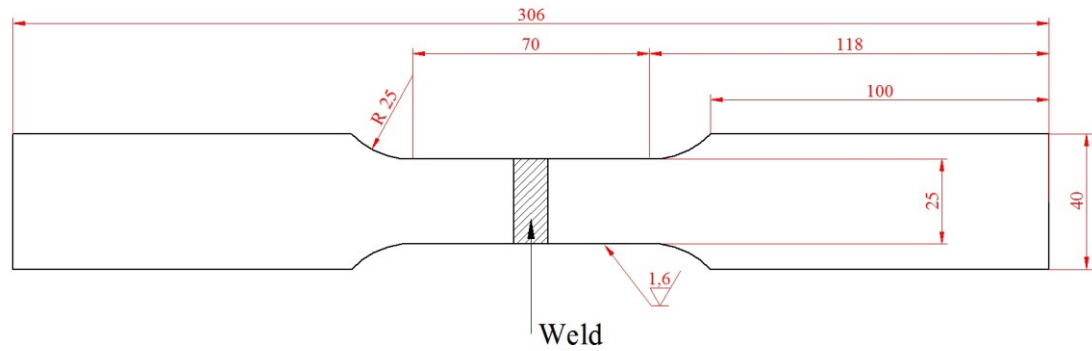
Dimensions of the welded samples for tensile testing.
